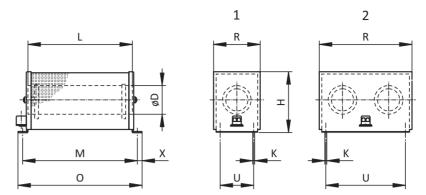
FZMU (1), FZZMU (2) dimensional drawing
